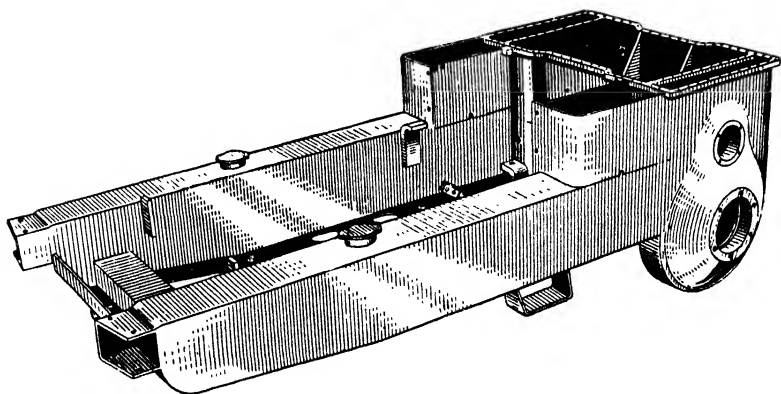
The improved welded tractor transmission case with its welded-on fuel tanks, belly guard, motor-hanger lugs, and generally more rigid design. The cost of this case and frame assembly was almost \$50 less than the original arc-welded design. (Courtesy of R. G. LeTourneau, Inc.)
